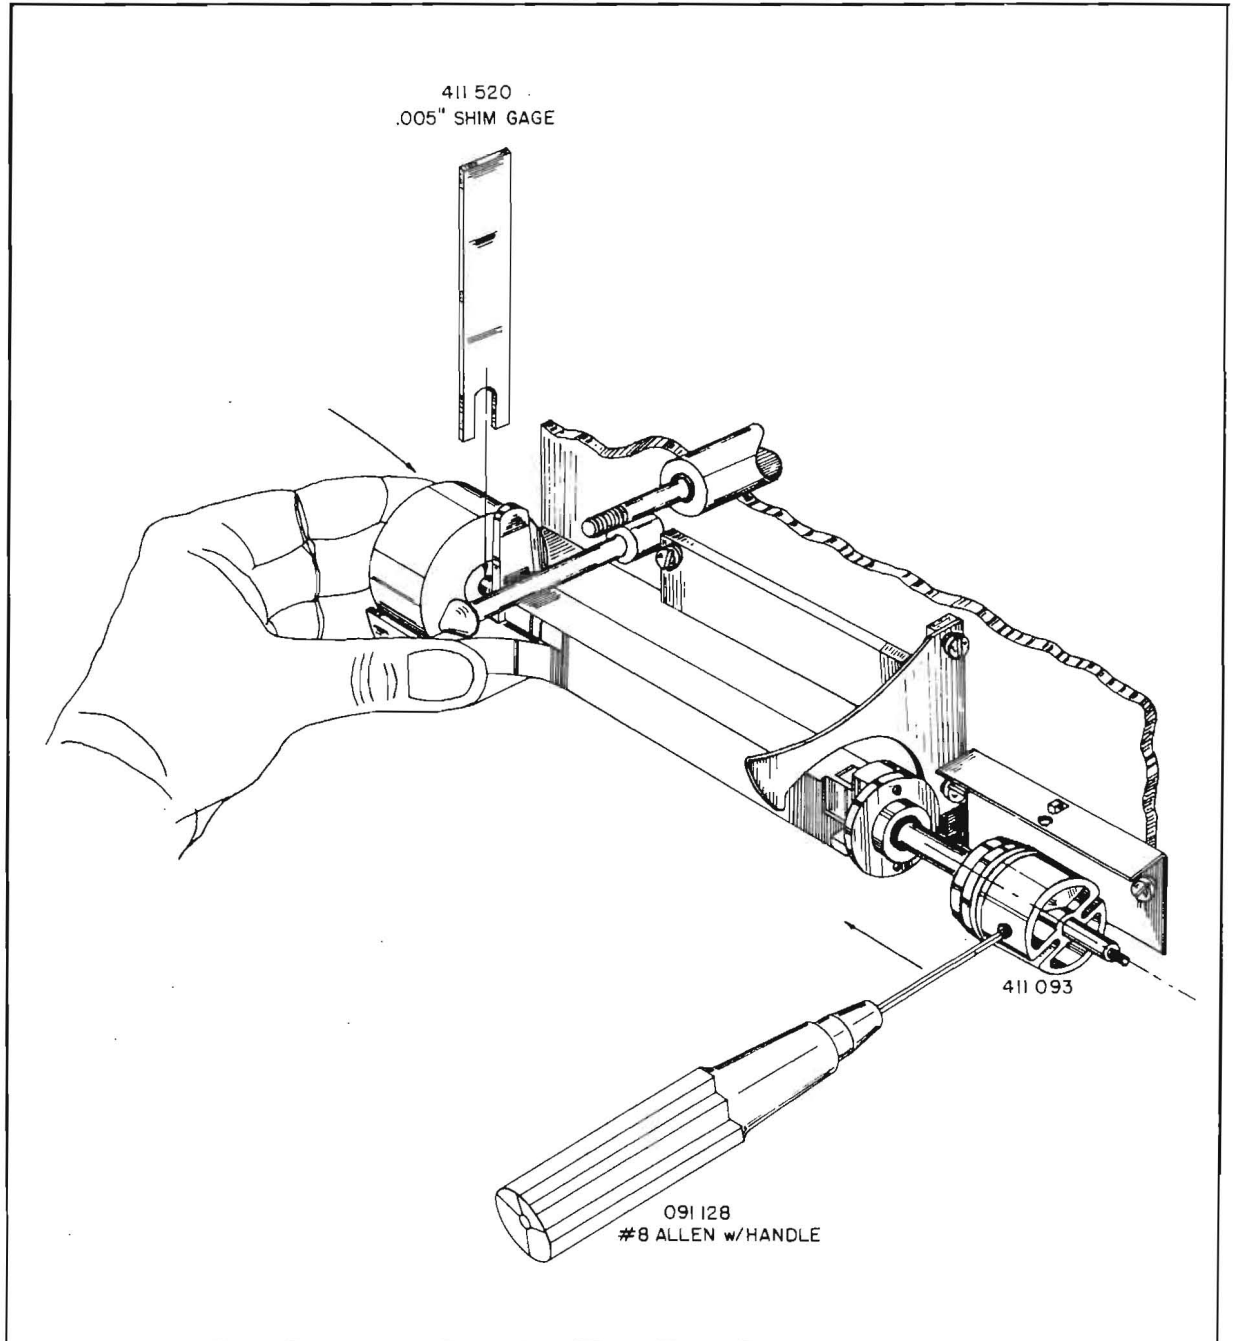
411093 Magnetic Recording Wheel Assembly Adjustment
